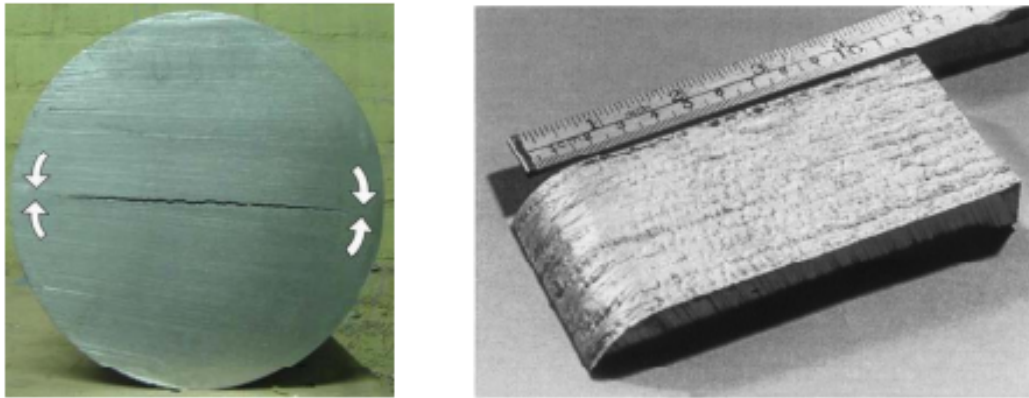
Cold cracks during DC casting process Thevik et al. (1999)
